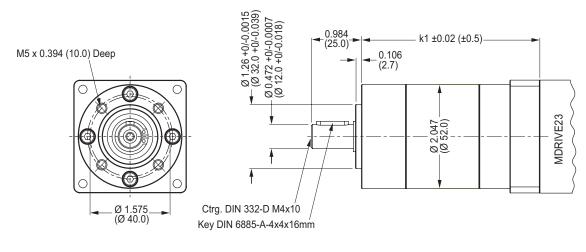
Planetary Gearbox Specifications for MDrive23Plus
